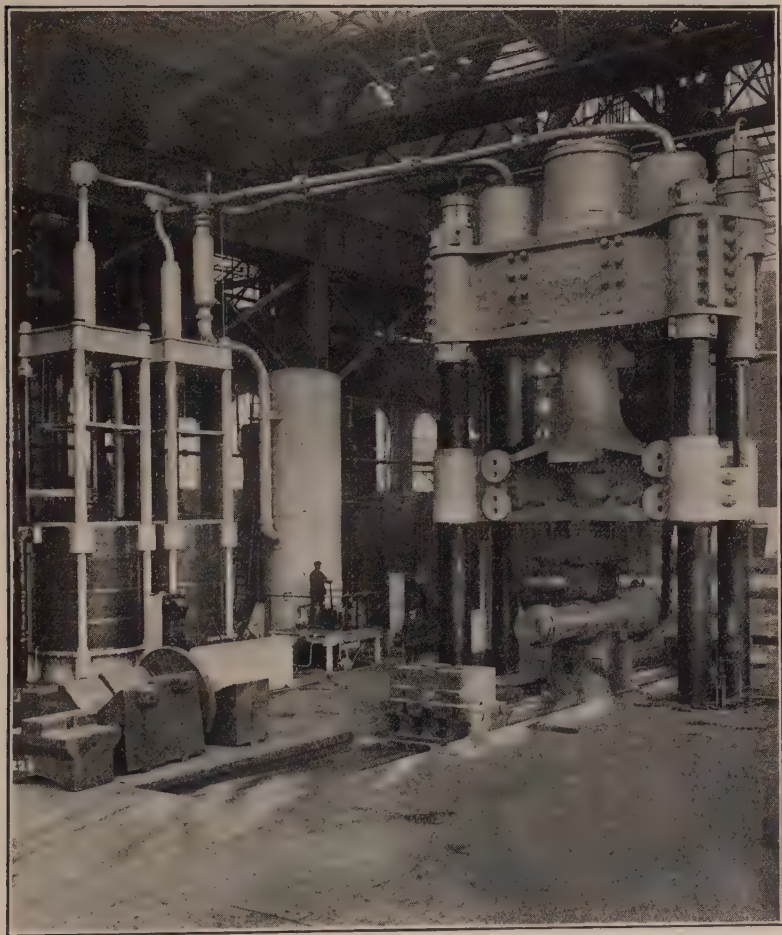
Modern Forging Press of 6000 Tons Capacity.
